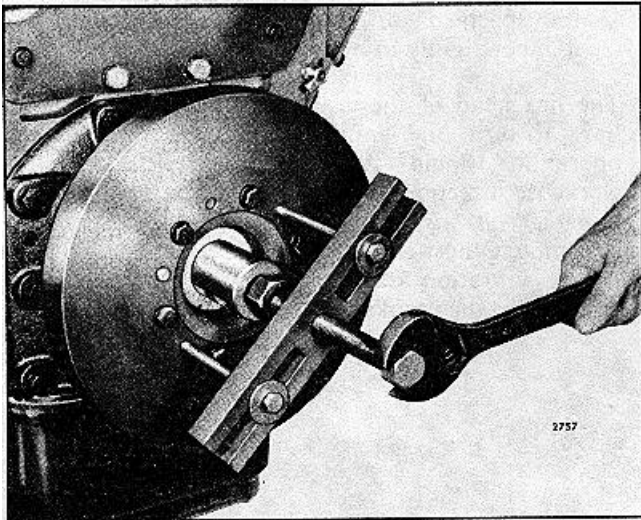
Removing Vibration Damper Outer Cone from a 12V Engine
